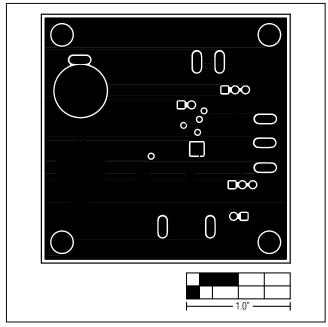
MAX16922 EV Kit PCB Layout—Layer 2 (GND)
